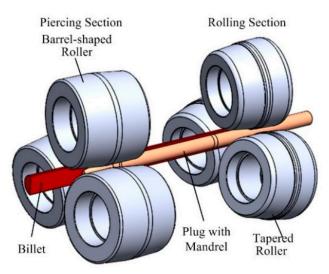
Process principle of tandem skew rolling [36] (Reprinted from ref. [36]).
